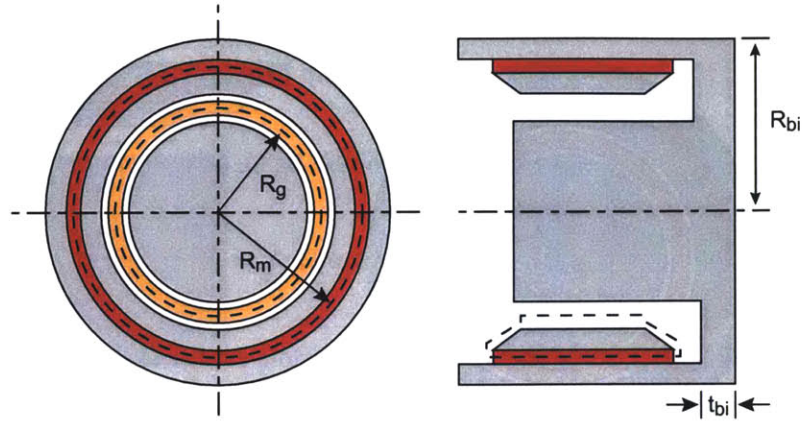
Schematic of cylindrical voice coil motor with key dimensions.
